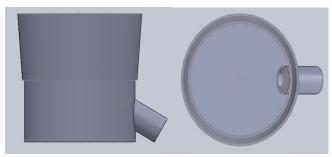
Air Inlet Pipe 30° Inclined Horizontally With Nozzle-Cooling Tower Model
